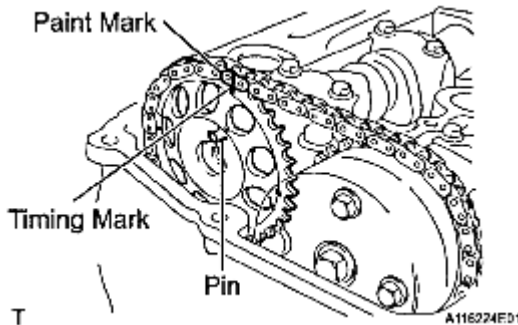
Identifying Timing Mark On Camshaft Timing Sprocket With Paint Mark
